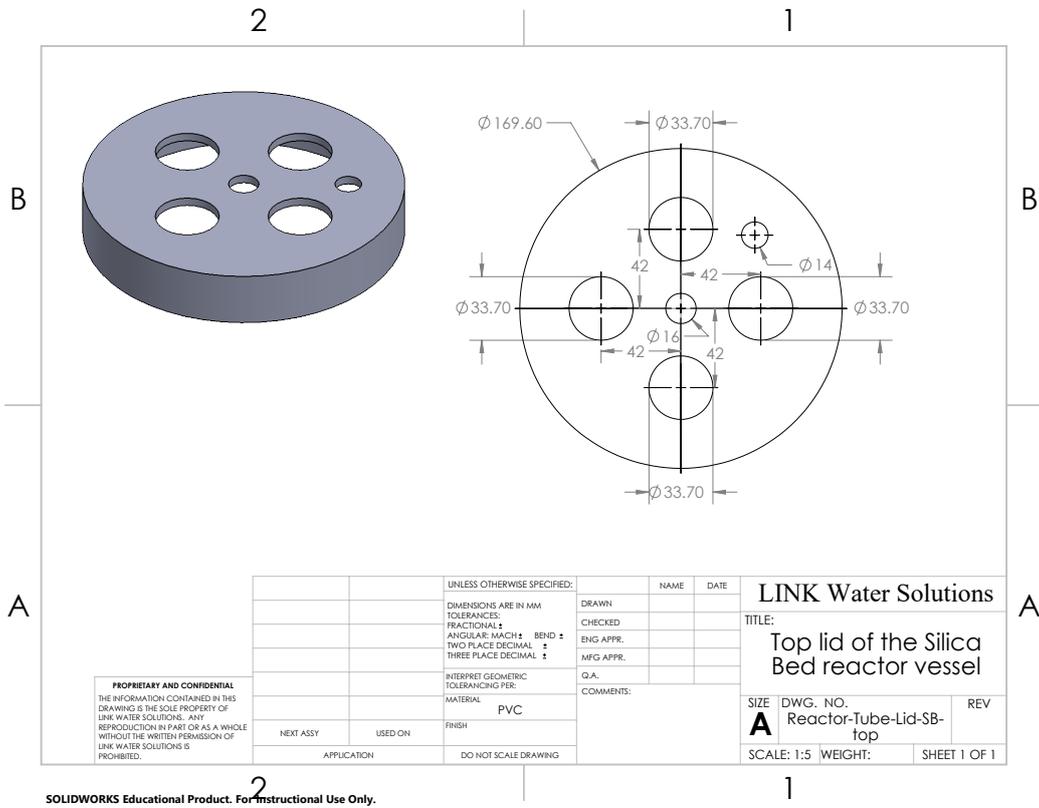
Technical drawing of the Silica Bed Tube top lid
